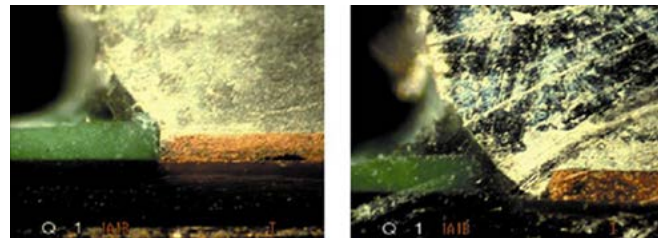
Non-solder mask swell (left) and solder mask swell (right).
